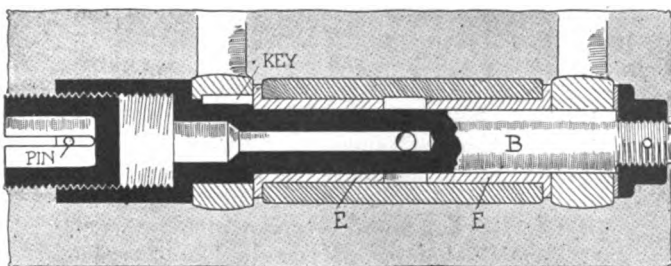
New European form of spring shackle for motor trucks, showing two bushings E with clearance space for grease between their opposite ends, also means for using a long, powerful screw-driver to place the necessary pressure on the grease
